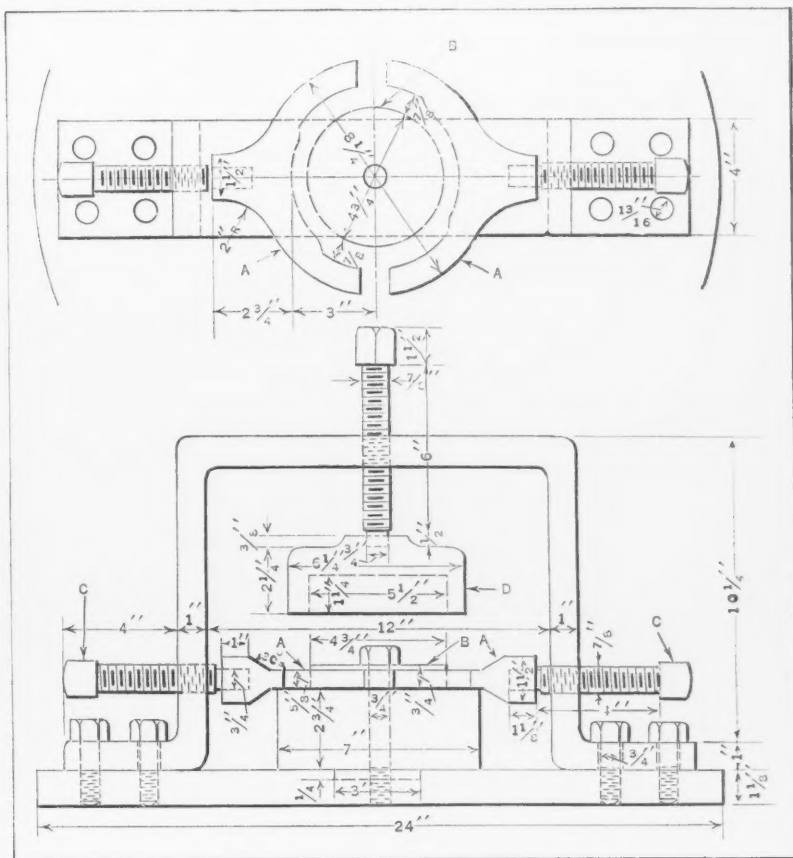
Plan and Elevation Views of Device Shown in Fig. 1
